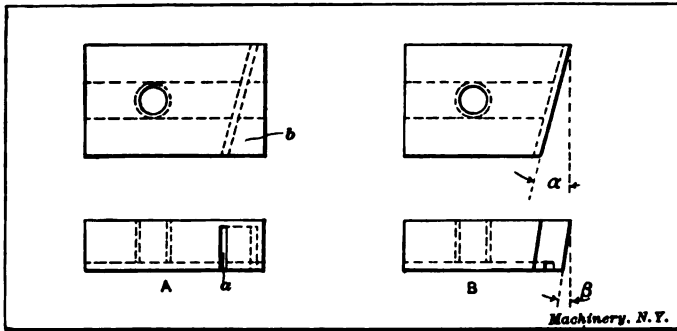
Type of Shaving Tool used in the Shaving-tool Holder shown in Fig. 29
